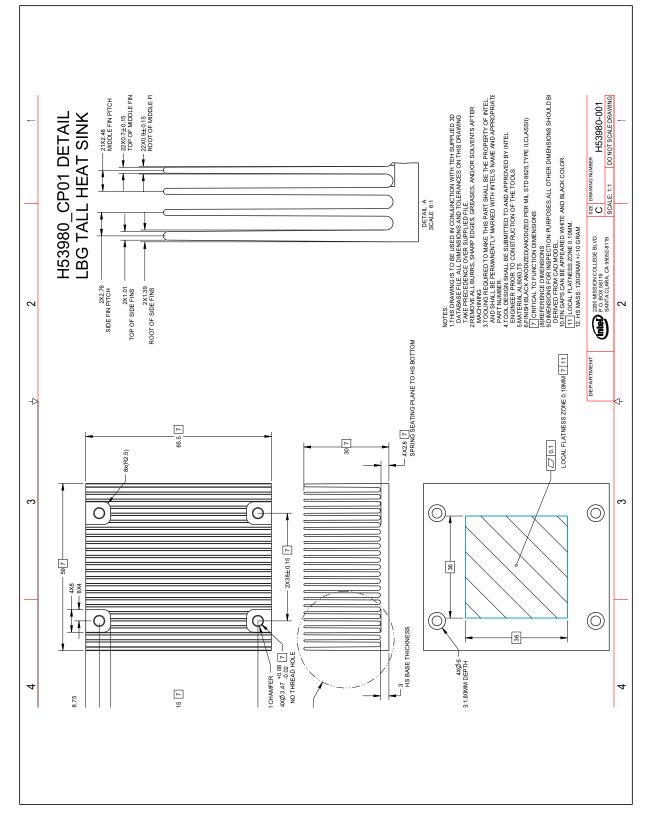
H53980 - Reference Heatsink Assembly Drawing - Sheet 1 of 2
